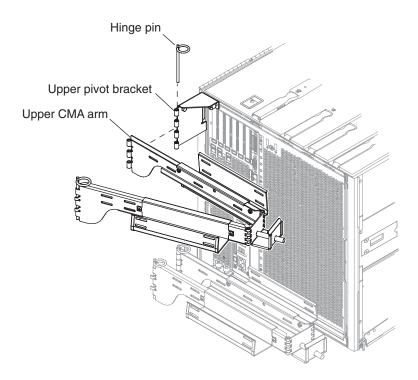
Attachment of Upper CMA Arm and Pivot Bracket
